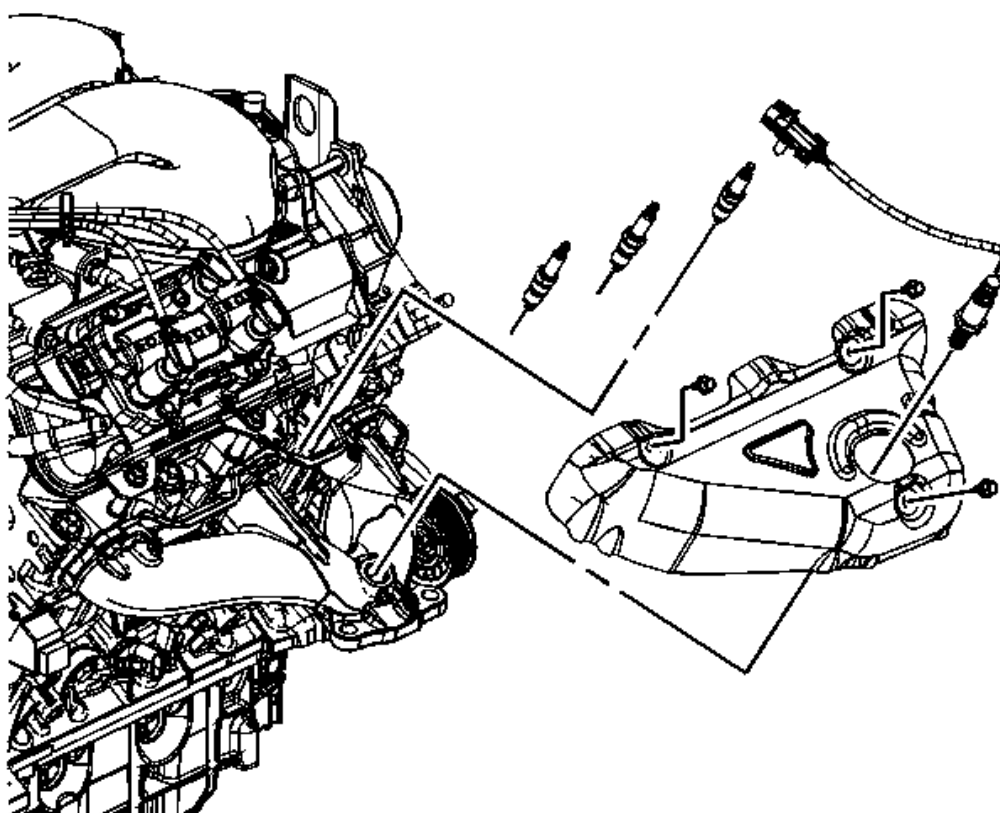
Identifying Right Side Spark Plugs, HO2S & Heat Shield
